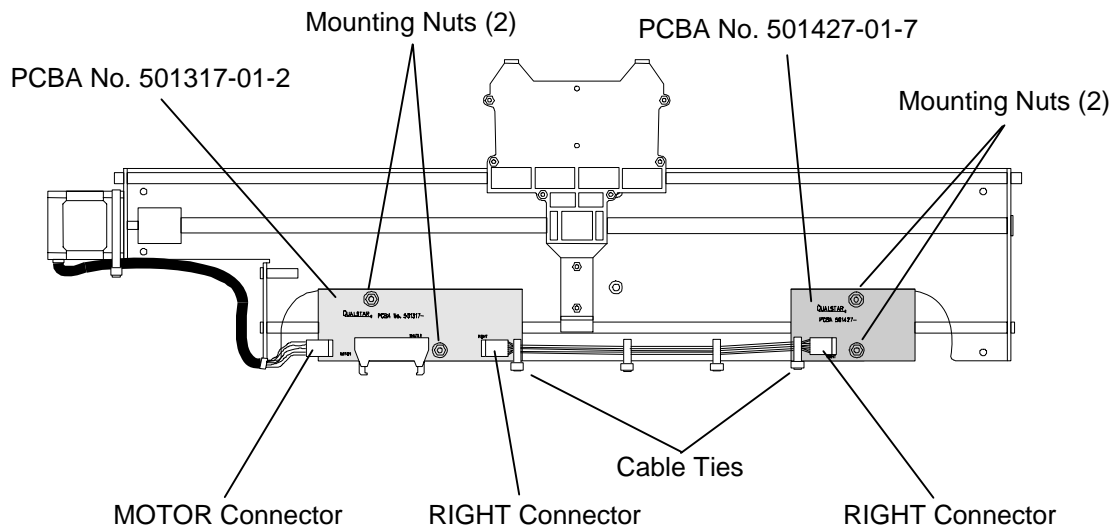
Shuttle PCBAs (Shuttle Assembly Bottom View)
